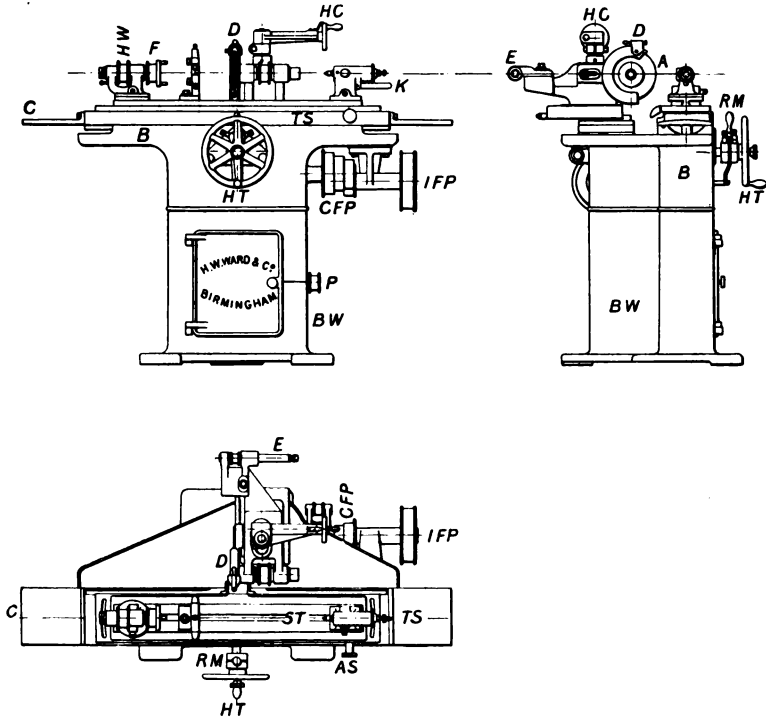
"Ward" Universal Cylindrical Grinding Machine.
